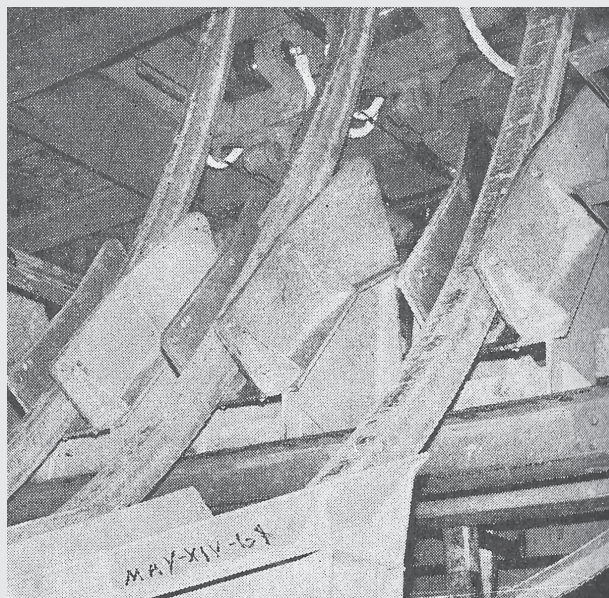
Strands of billet steel emerge from the LASCO continuous casting machine. (Anon 1964, 24)
